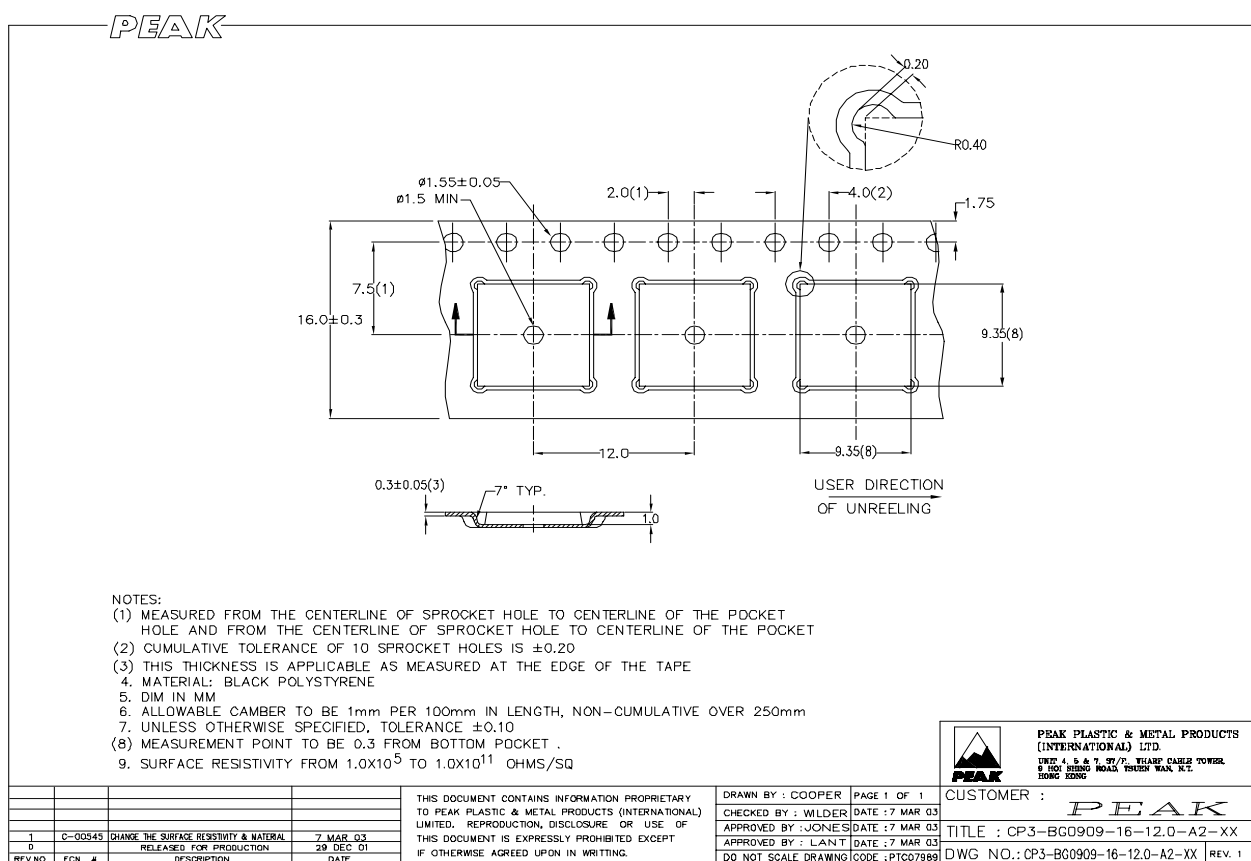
Example QFN-32 Tape and Reel Detailed Mechanical
